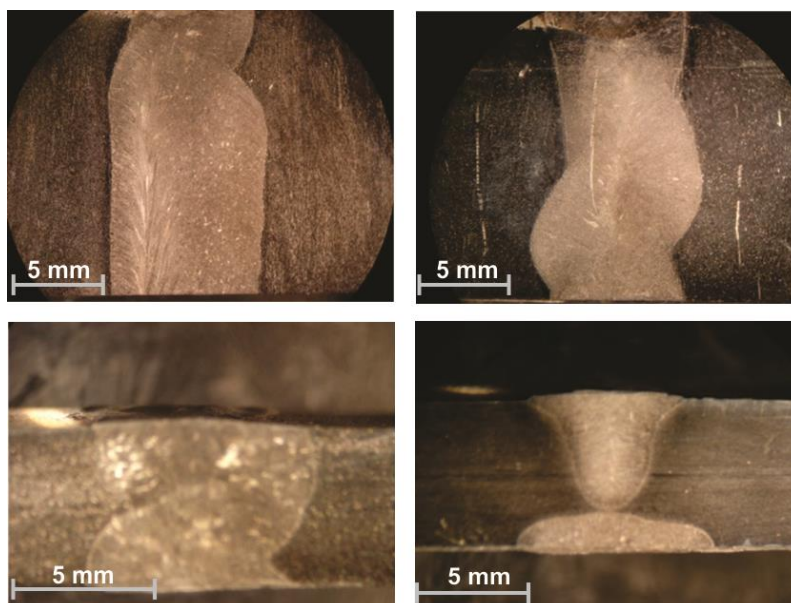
Welding zone stereographic macrograph of the austenitic SS. a) 304 surface, b) 304 cross-section, c) 316 surface and d) 316 cross-section.
